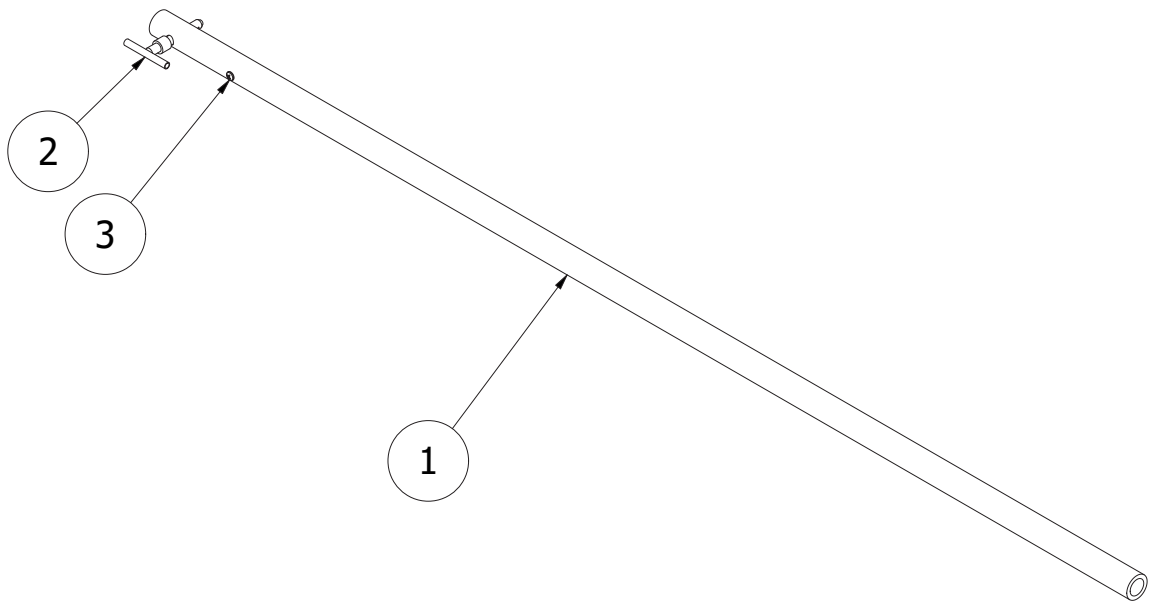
AGSE-E22115-S01 Caster Lift Bar Assembly
